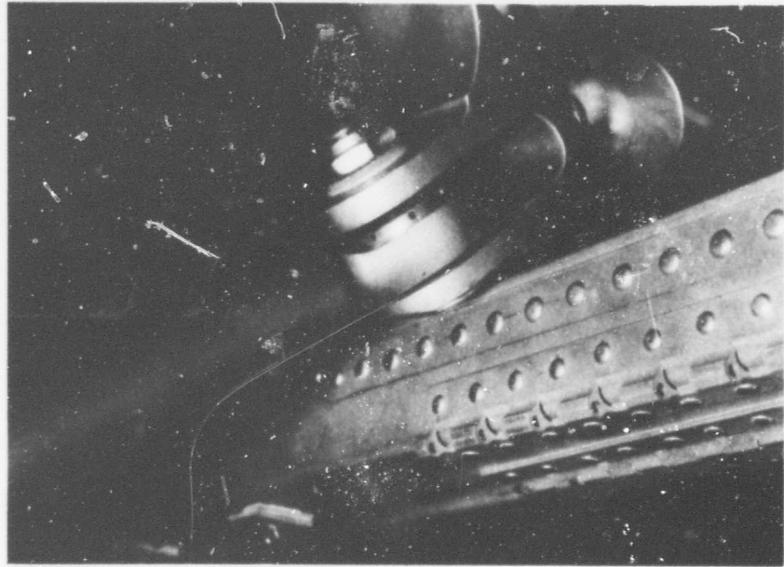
Oblique View of Rod End Bearing Shift in MLG
